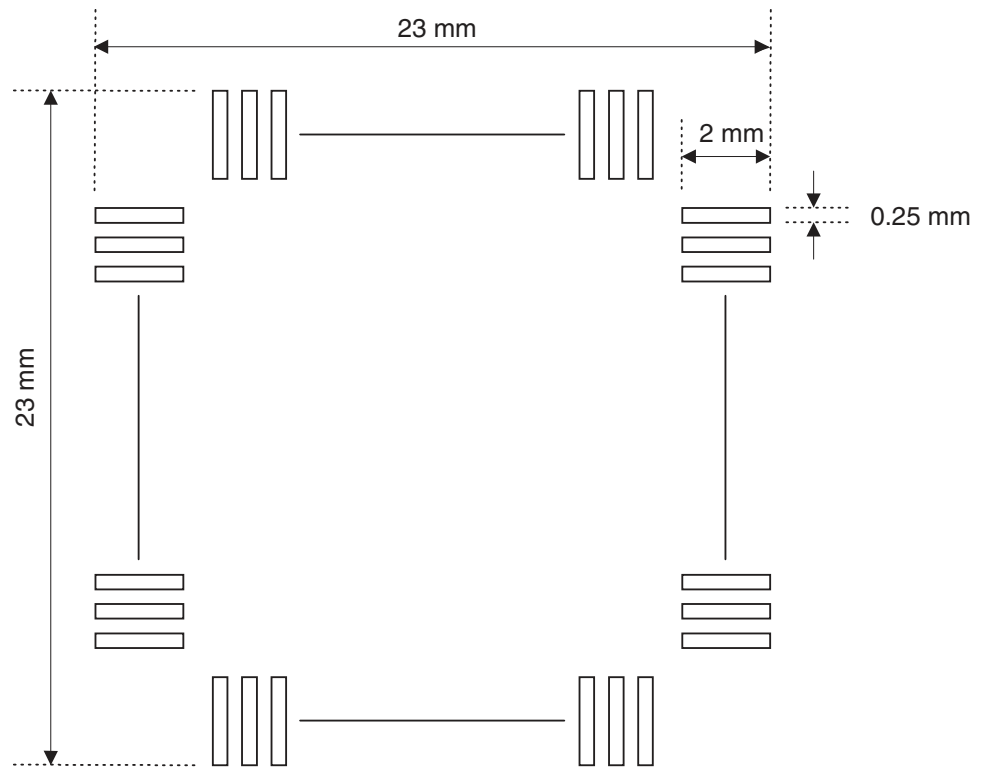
Recommended dimensions of the footprint for mounting the NQPACK
